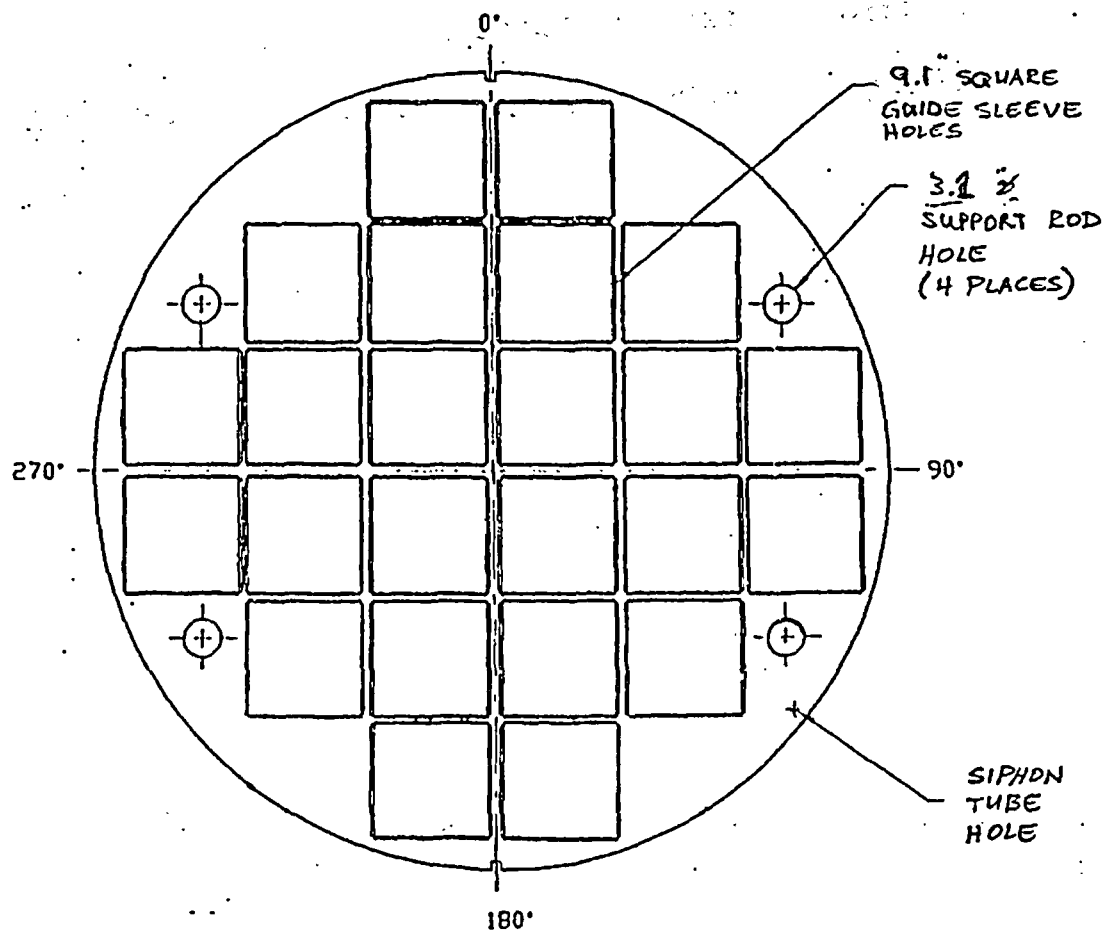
SPACER PLATE DETAIL [6]
